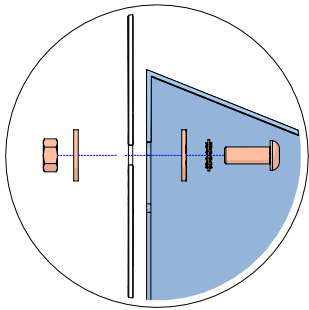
Drilling the Head Unit to Attach the Canopies
